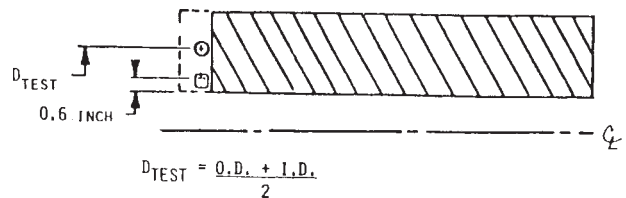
Outside Diameter and Inside Diameter as Required by Drawing
